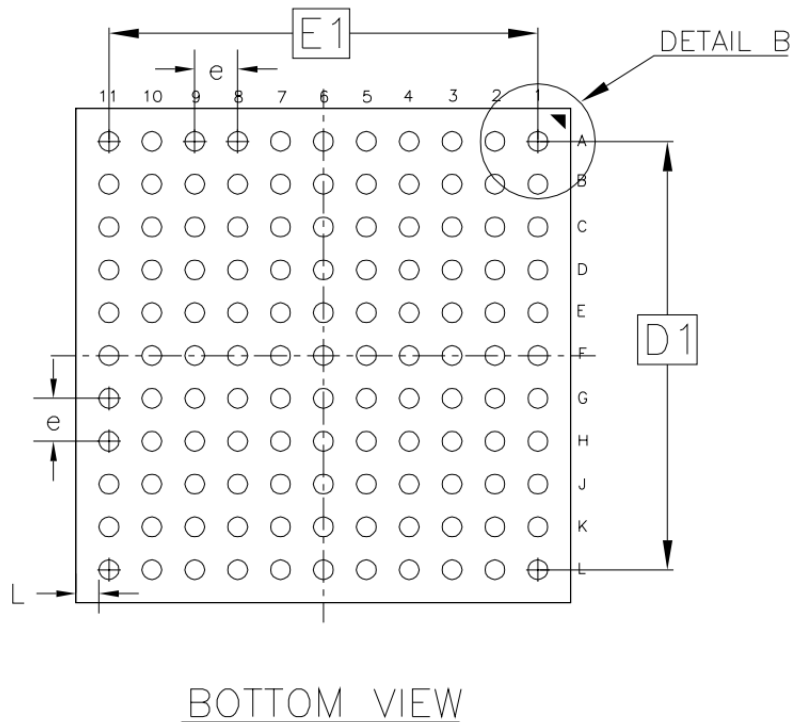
RKNanoD-G LFBGA121 Package BOTTOM View
